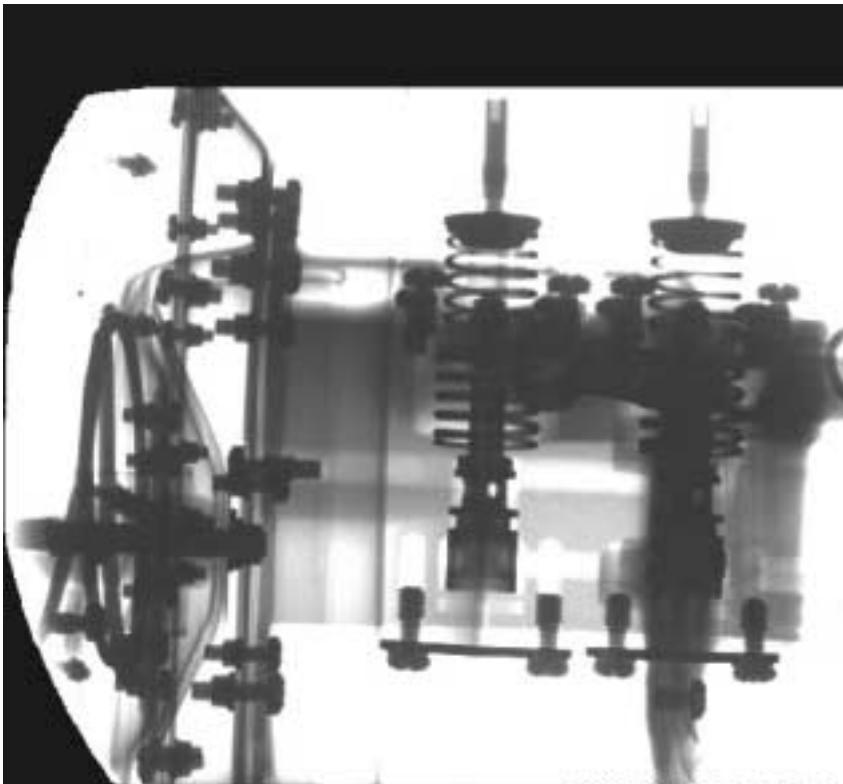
Lower Pressure Relief Valve, control assembly x-ray.
